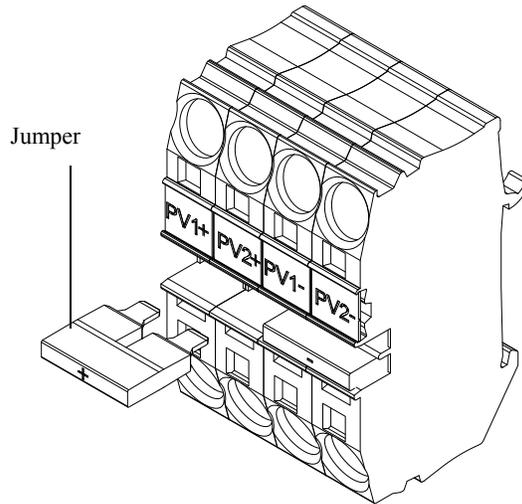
MPPT Shorting Connector and Jumper arrangement
